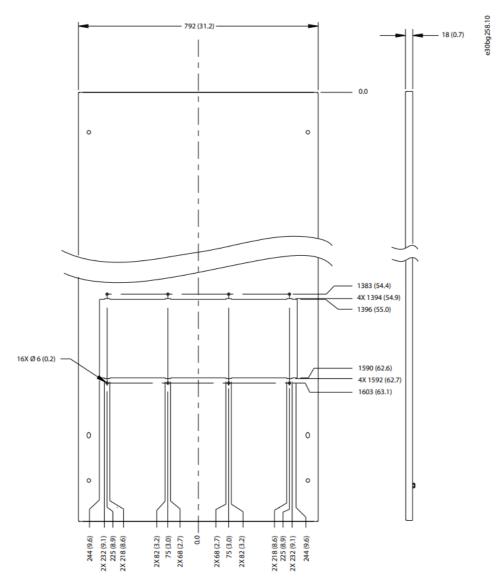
Vent Dimensions for Backplate in 800 mm (32 in) Cabinet
